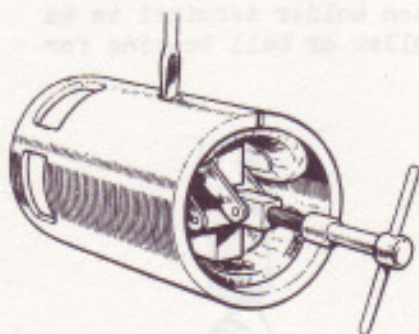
FITTING FIELD COILS SHOWING USE OF POLE SHOE EXPANDER.
